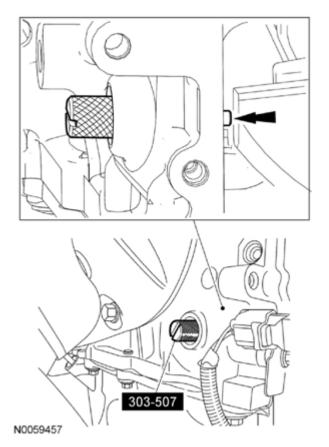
Locating Crankshaft TDC Timing Peg (303-507) Courtesy of FORD MOTOR CO.
